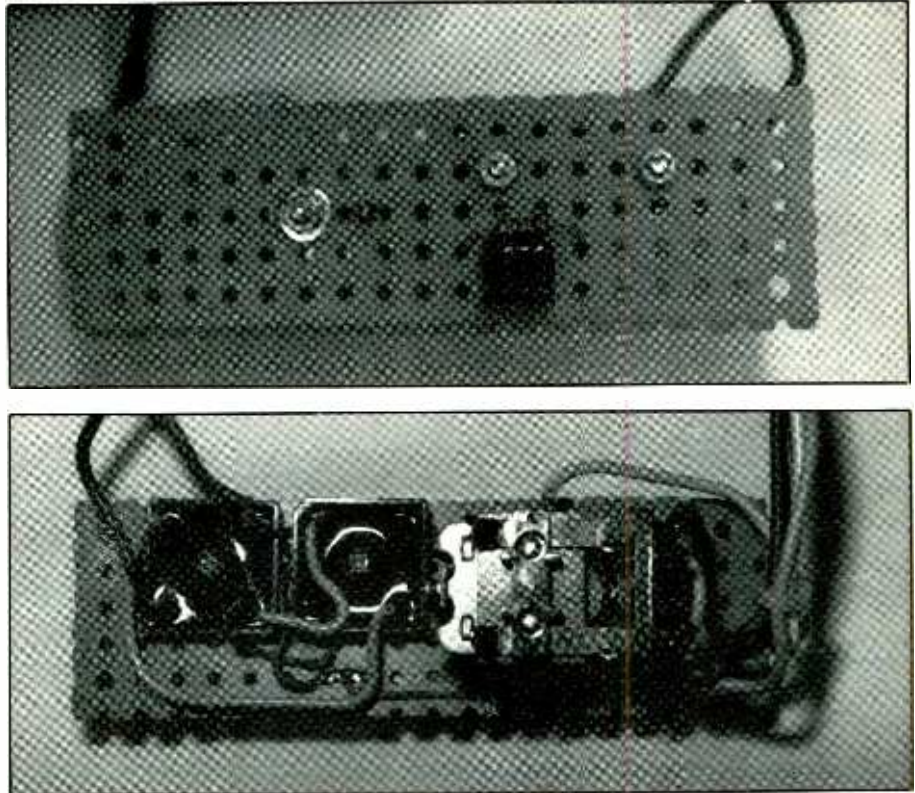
Author's prototype was built using perforated board, with optoisolator in a socket and the resistor on top (upper photo) and rectifier assemblies and relay on the bottom (lower photo).
